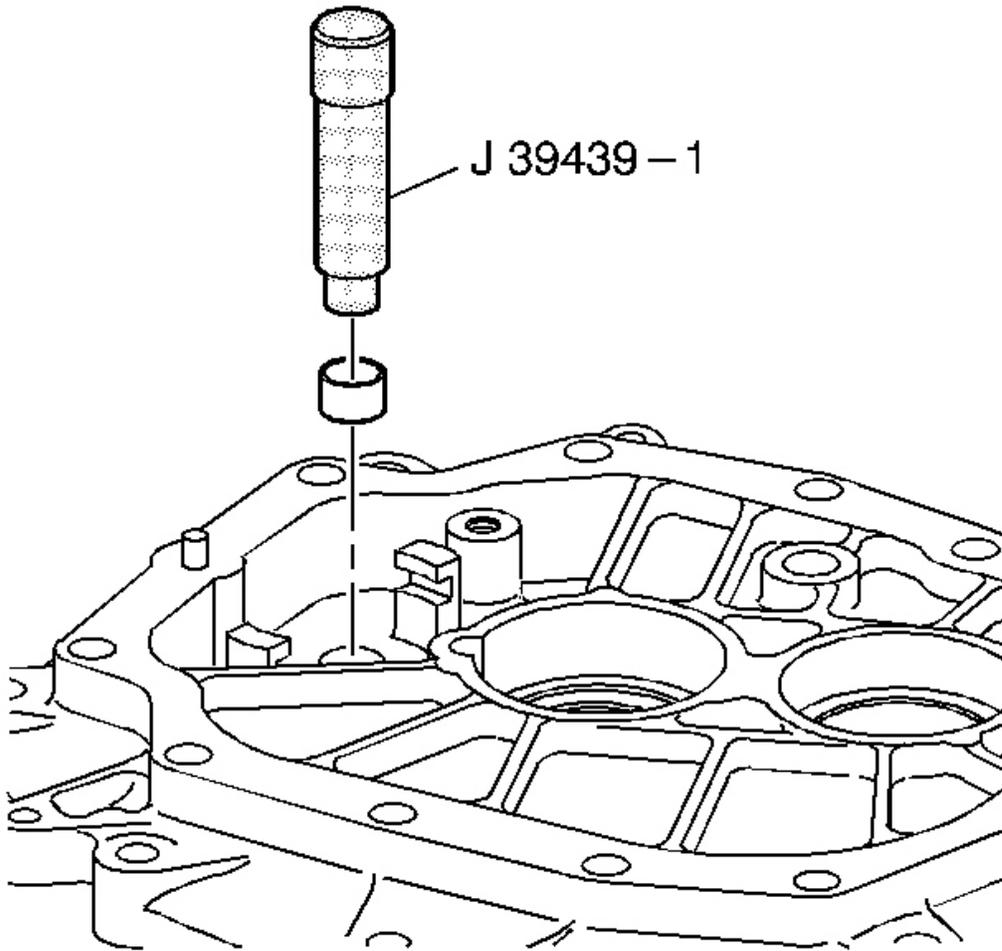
Identifying 1st/2nd, 3rd/4th Speed Shift Shaft Bushing
